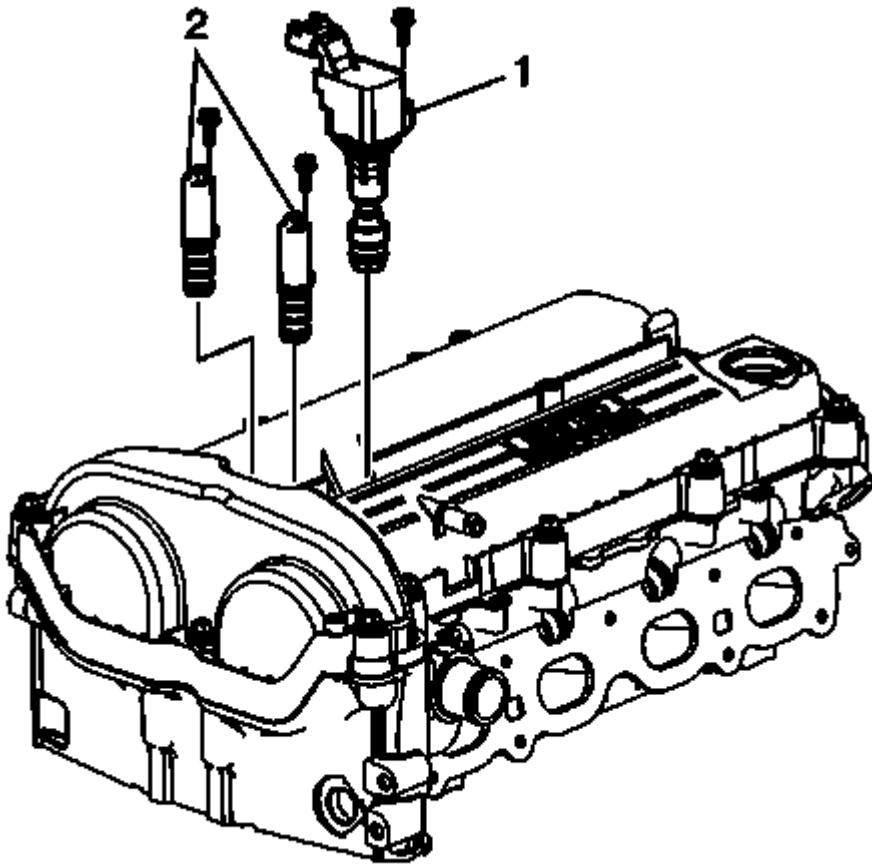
View Of Ignition Coil And Camshaft Position Actuator Solenoid Valves
